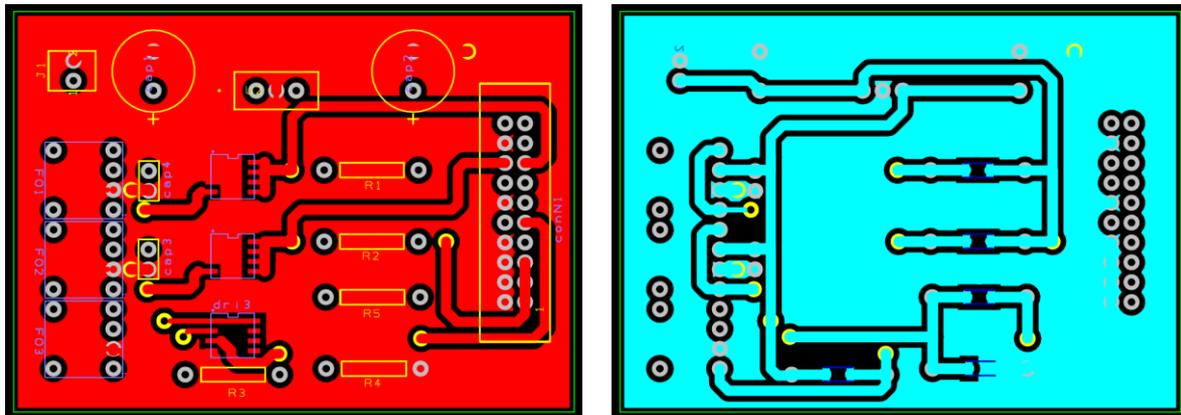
The PCB Layout of INT2. Top layout (Right), Bottom Layer (Left).
